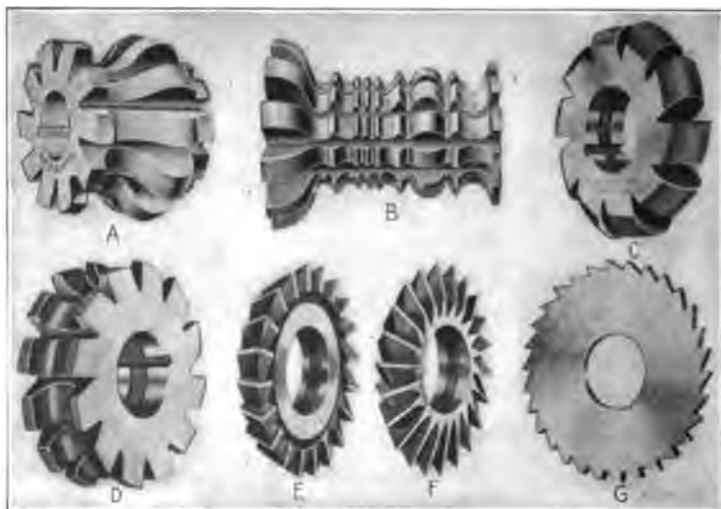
Formed Cutters, Angular Cutters, and Slitting Saw
